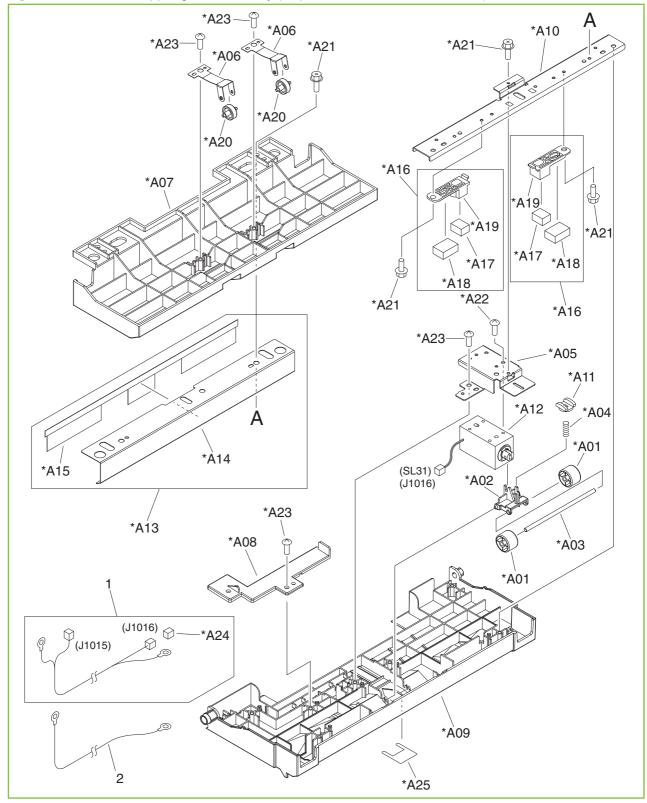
Entrance upper-guide assembly (stapler/stacker and booklet-maker)
